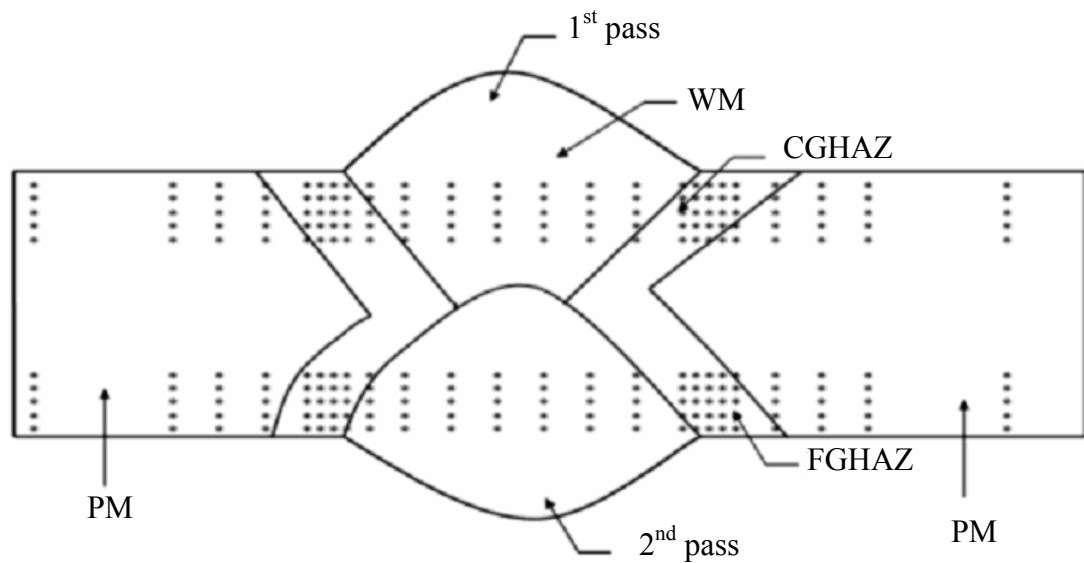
Illustration of transverse hardness measurements on the weldment.
